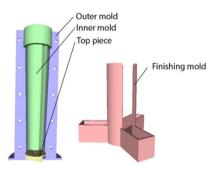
Mold parts (only one out of two identical outer mold parts is shown).
